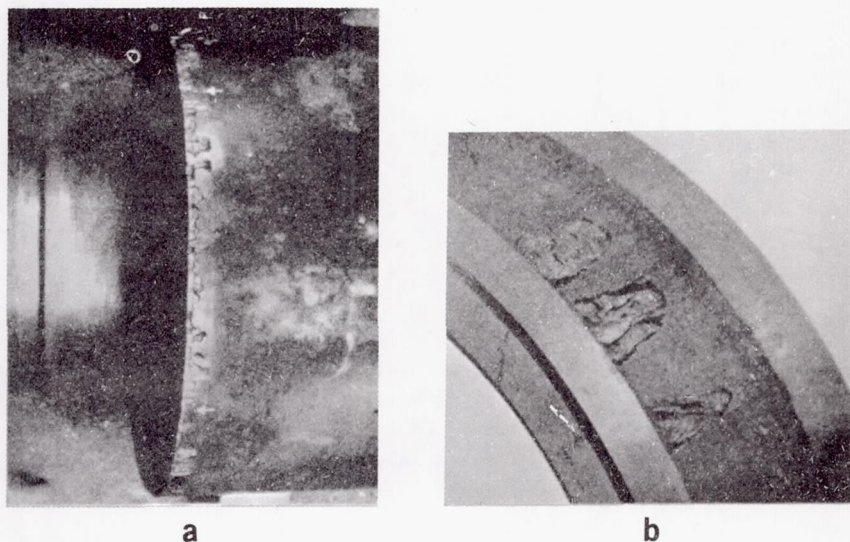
(a) Geometric stress concentration mode of contact fatigue damage on a steel mill backup roll according to Lucas (ref. 56). (b) GSC mode spalling on a cylindrical roller bearing run under excessive deflection or misalignment, according to Simpson (ref. 57).
